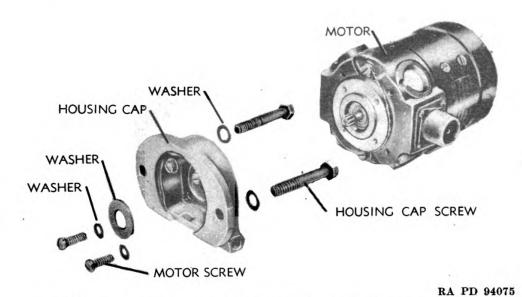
20-mm left-hand feed mechanism M3—Assembly of motor to housing cap.
